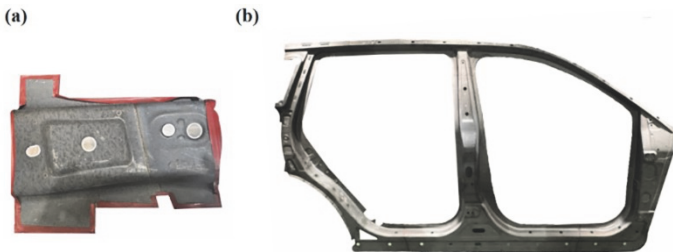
(a) A part of laser-welded automotive B-pillar (b) The laser welded door ring by direct laser-filler wire welding after hot stamping.
